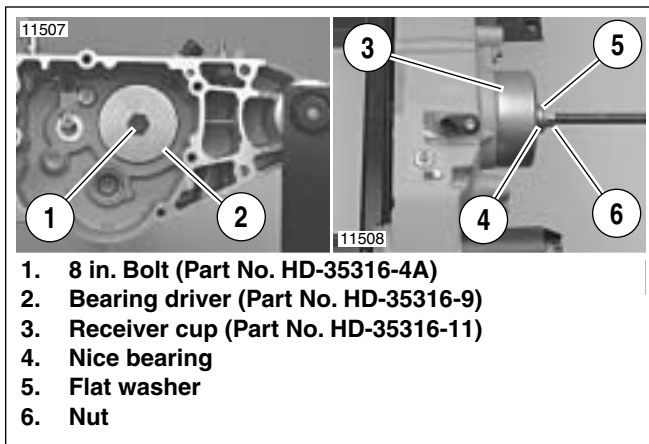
Removing Main Drive Gear Bearing (Typical)
